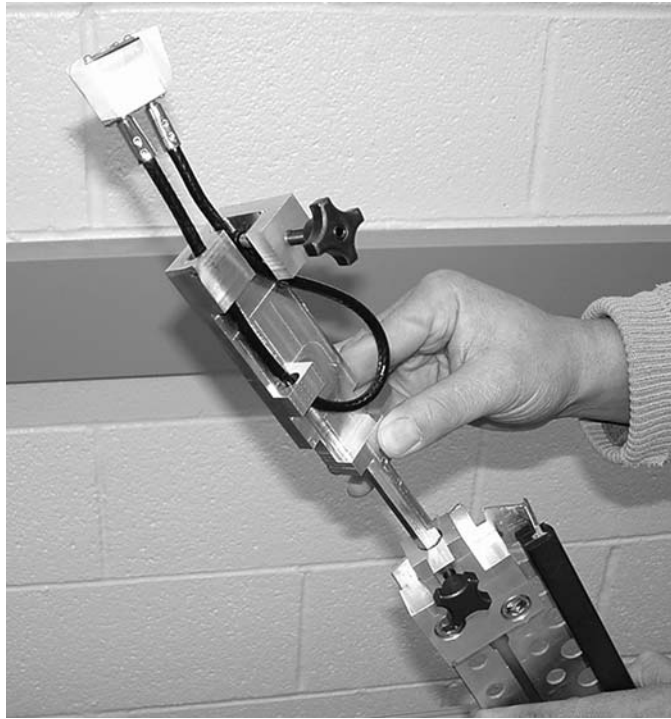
Close Up of Cable Lock Installed in Cable Clamp Holding Fixture
